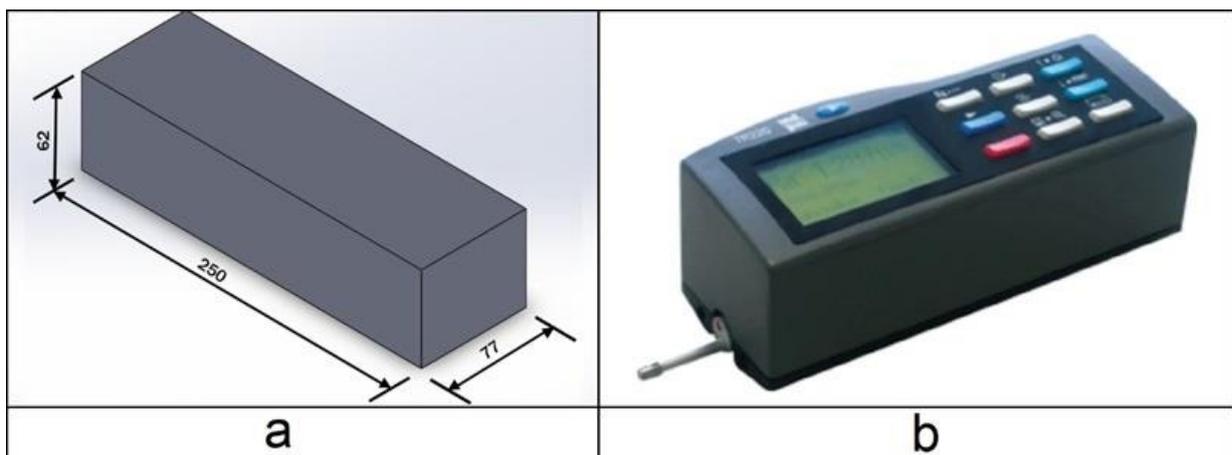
a) Test Specimen with Dimensions 250 x 77 x 62 mm, b) Digital Rugosimeter Model TR 220.
